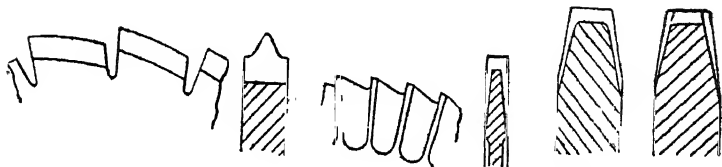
Thread-milling cutters for square, acme, worm, and vee threads.
